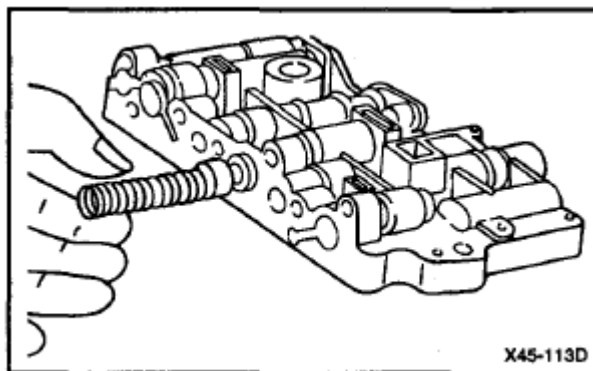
Removing/Installing Regulator Valve & Regulator Spring
